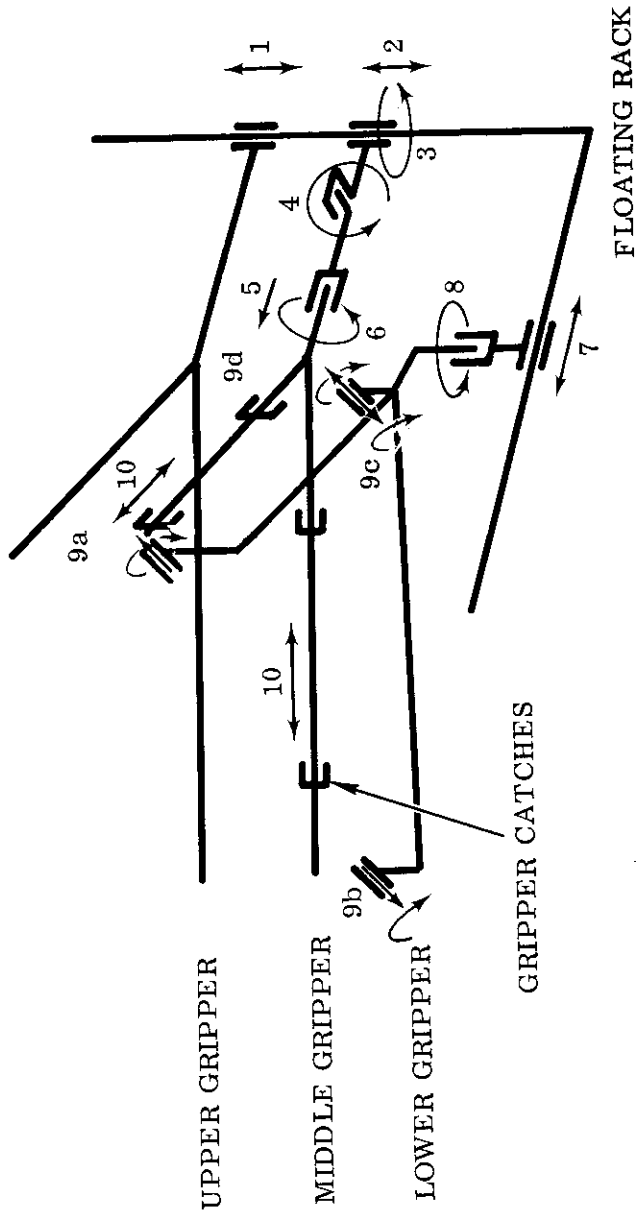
Assembly Equipment Mechanism Functions - Schematic
